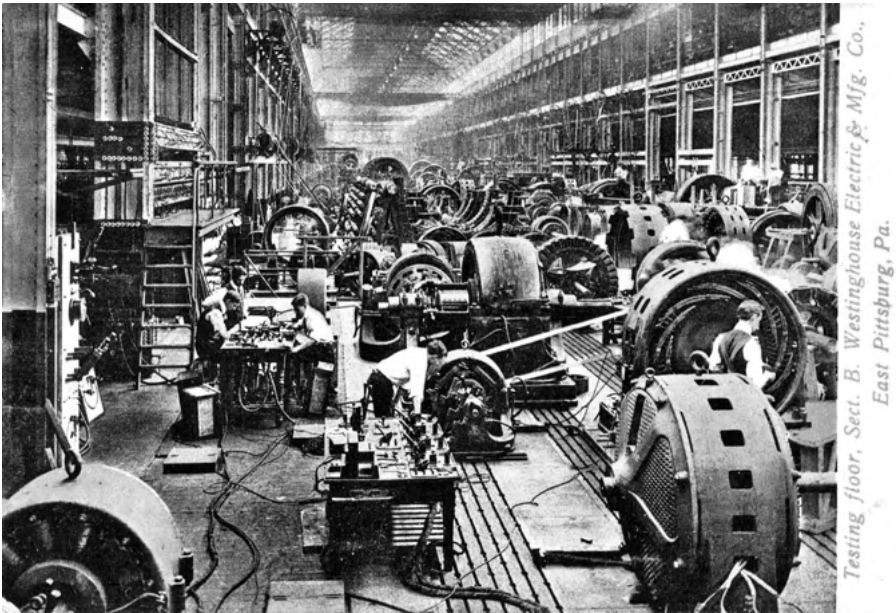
Postcard depicting Testing Floor in the East Pittsburgh Westinghouse facility where dynamos were tested. (Author's collection)
